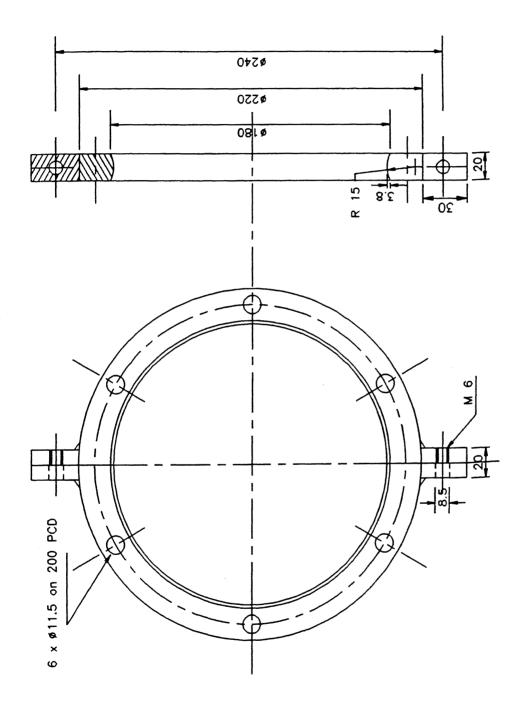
Two Piece Mould for Circular Ring with Curved Cross—section
